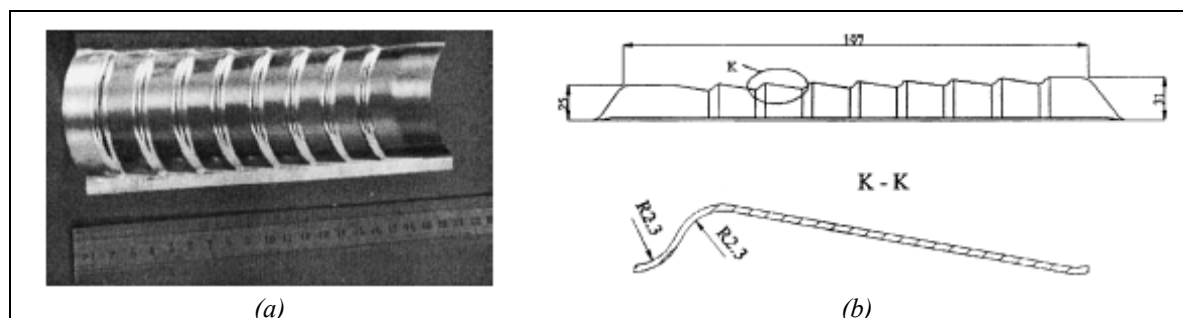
(a) Corrugated thin-walled sheet part with small radius; (b) main dimensions of the experimental VPF corrugated thin-walled sheet part with small radius.
